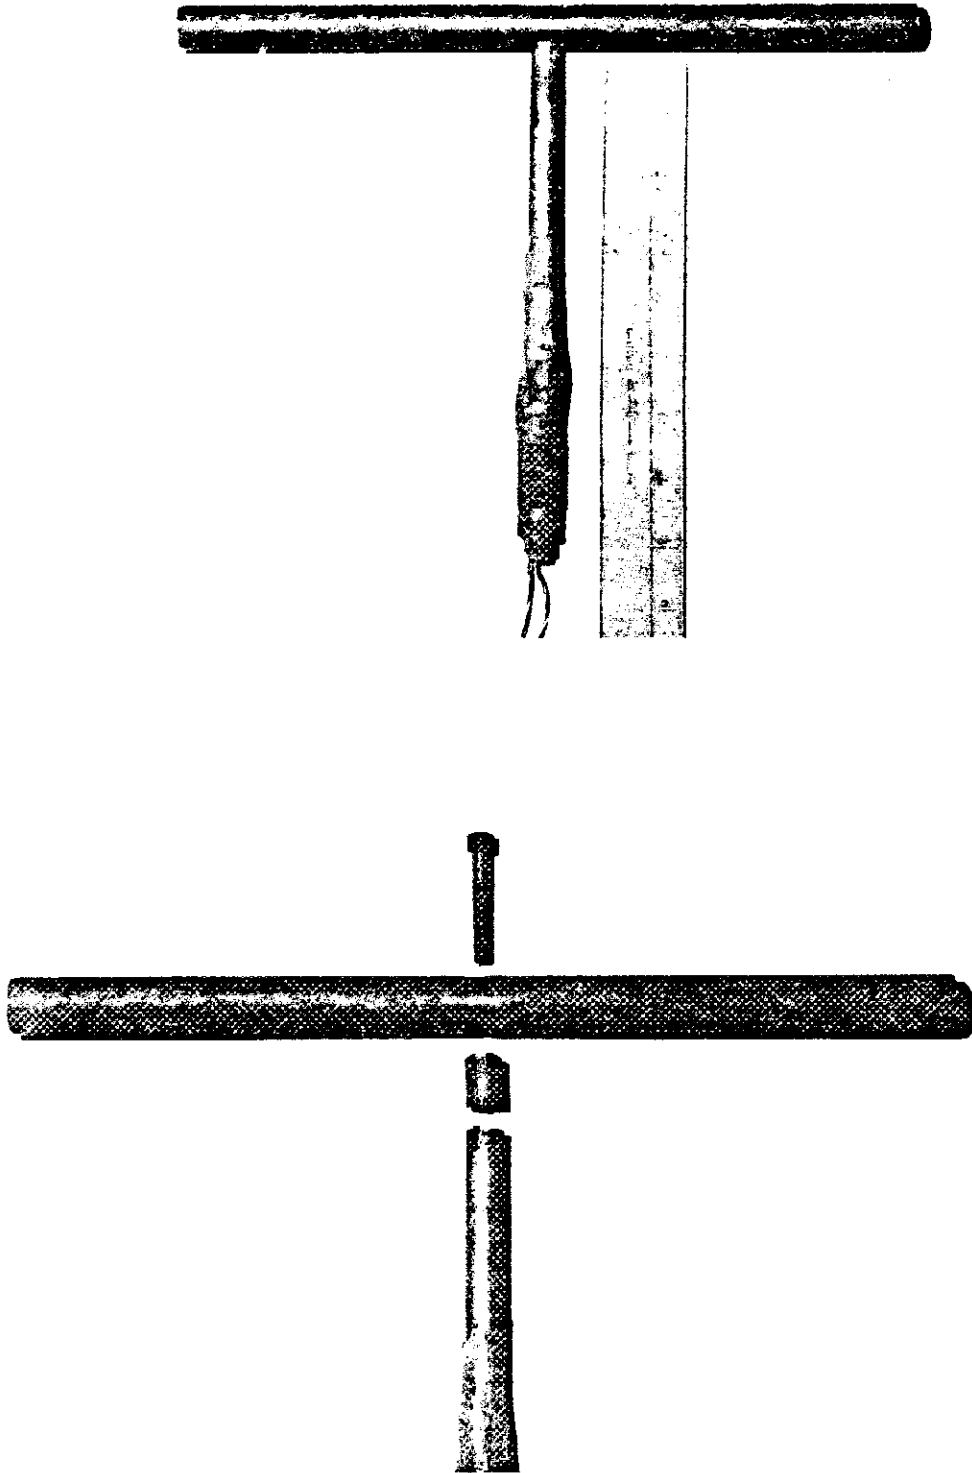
Exploded View of Pipe, Stub and Pipe Munter
